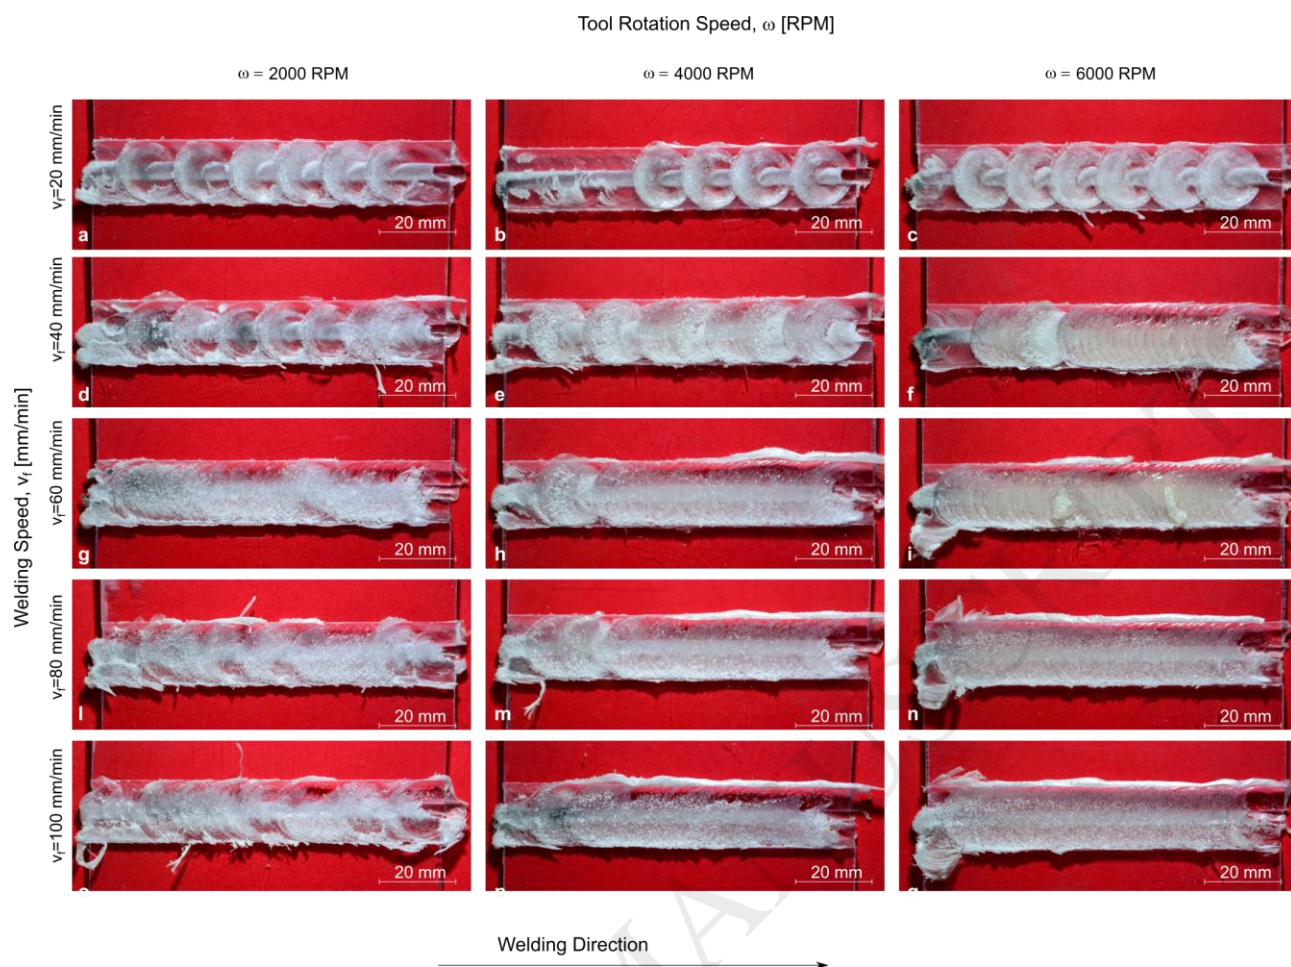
Upper surface of welds performed under different processing conditions.
